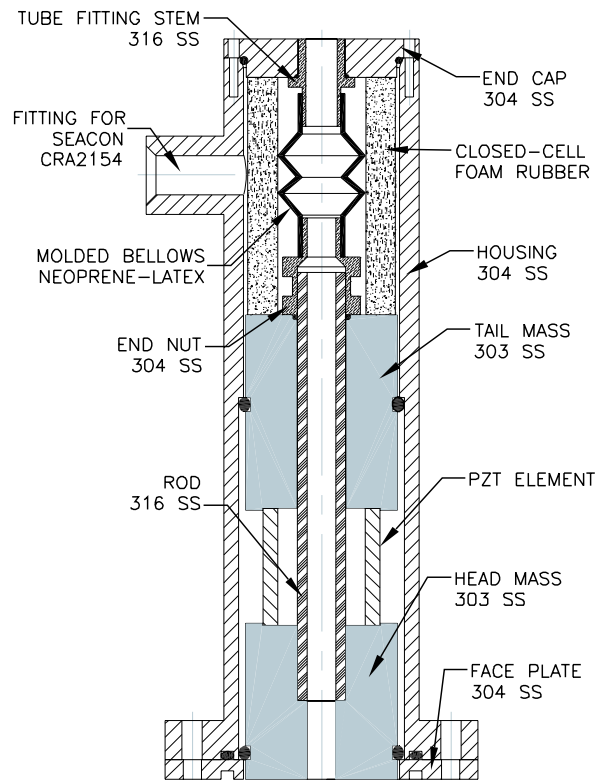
Cutaway drawing of the source transducer with pass-through hole. Electrical wires are not shown.
